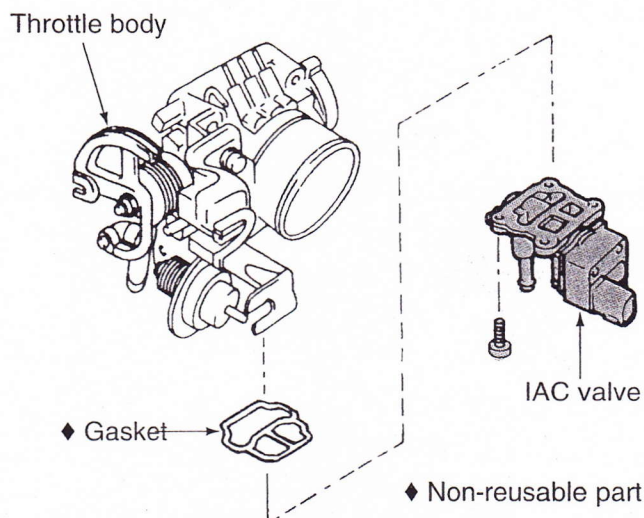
Throttle body assembly of a port fuel injection system. *Courtesy of Toyota Motors
